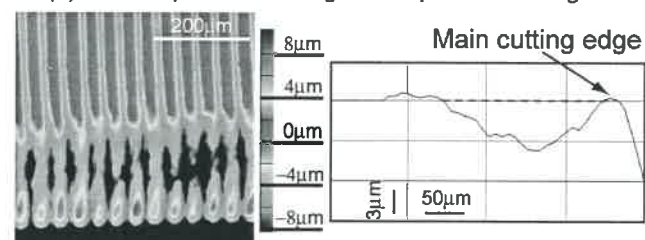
Developed cutting tool with micro stripe grooved surface
